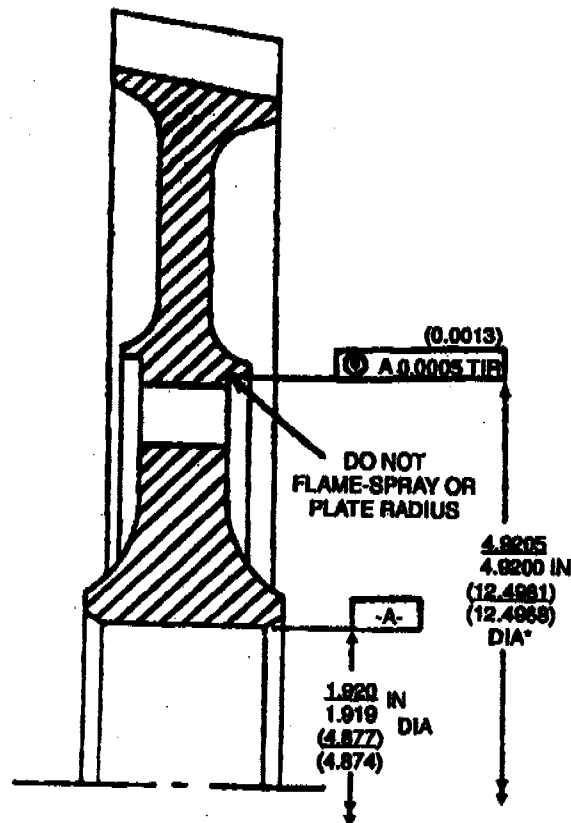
First Stage Power Turbine Rotor and Spacer Dimensional Inspection Locations (Metric).
